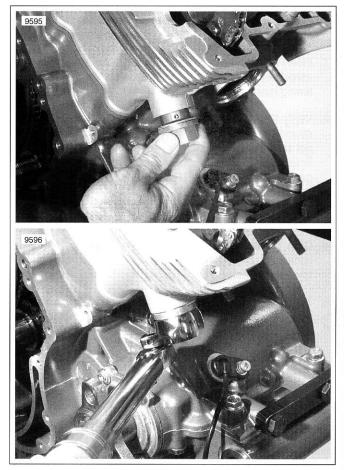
Rear Cylinder Cam Chain Tensioner
